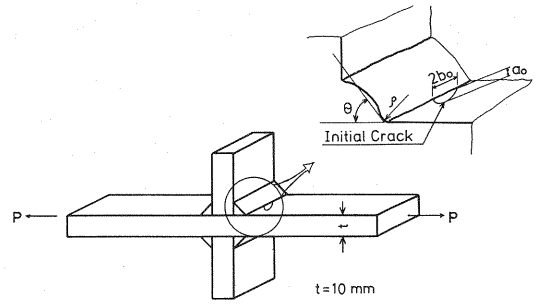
Typical test specimen for non-load-carrying fillet weld. Fatigue cracks normally initiate at the weld toe.
